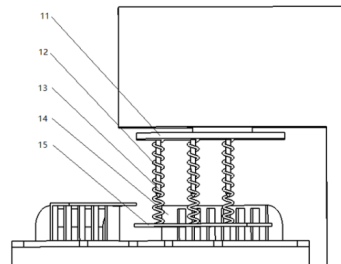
Enlarged details of the device. 11-Drive plate; 12-Spring; 13-Drill bit; 14-Slide rail 2; 15-Pressure plate
